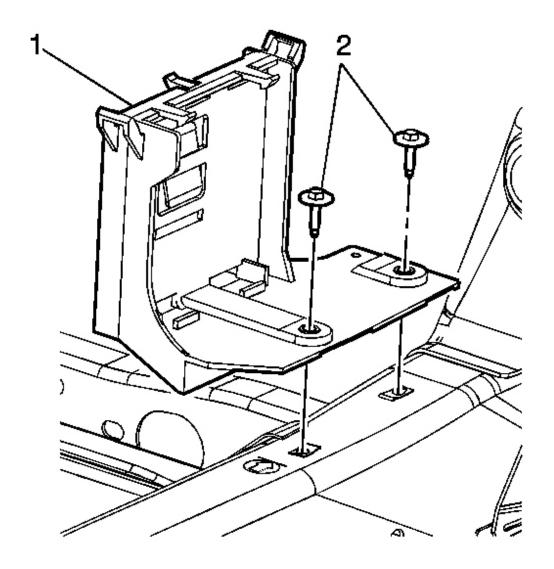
ECM/TCM Bracket Retaining Bolts Courtesy of GENERAL MOTORS CORP.
